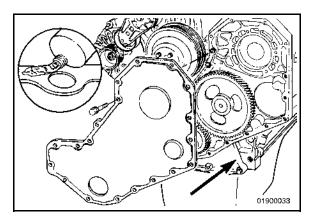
APPLY A BEAD TO THE COVER SIDE OF THE FRONT GASKET
